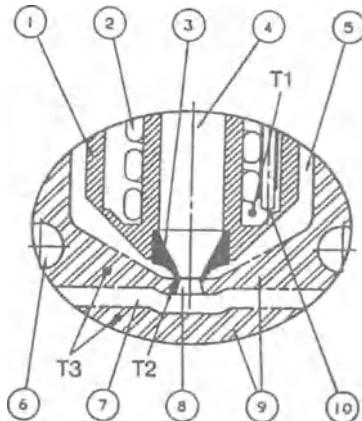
Example of a hot-runner gate: 1, hot-runner nozzle; 2, heating element; 3, nozzle seal; 4, melt flow channel; 5, air gap insulation; 6, mold cooling; 7, mold cavity; 8, gate; 9, mold steel; 10, thermocouple (in copper pocket); T₁, hot runner (processing) temperature; T₂, gate-area temperature; T₃, mold temperature.
